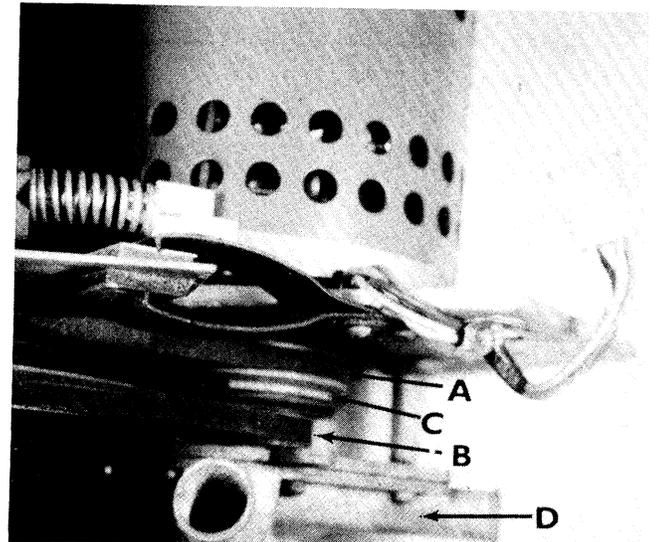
Spin Shaft with Housing and Brake Assembly Removed
